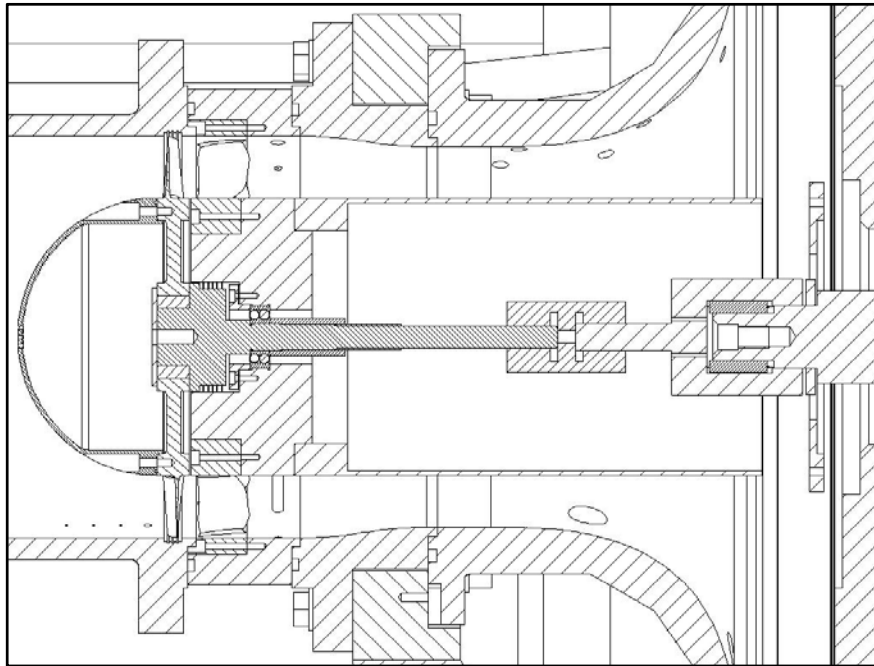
Axial Compressor Configuration with one self-aligning ball bearing of the type SKF 1202 ETN9 supporting the shaft.
